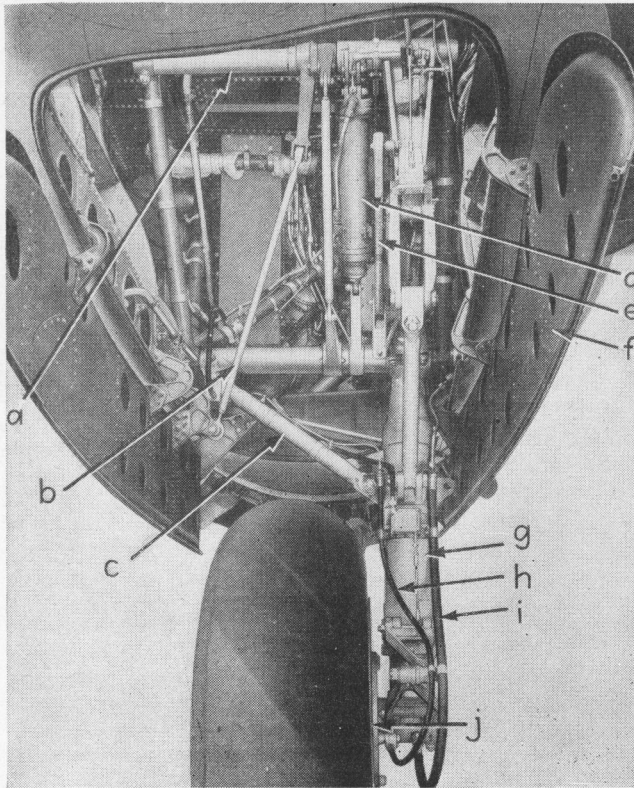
Rear landing wheel: (a) support shaft; (b) door control rod; (c) brace; (d) actuating cylinder; (e) bungee ring; (f) nacelle door; (g) shock strut; (h) hydraulic brake hose; (i) emergency air brake; (j) wheel and brake.
